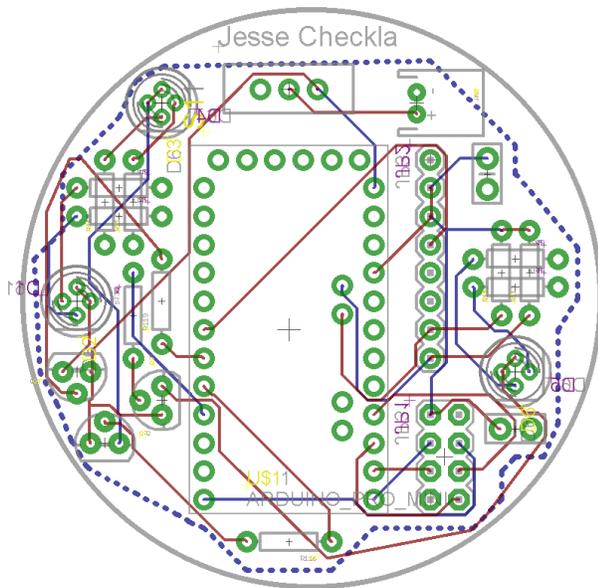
2 Layer PCB Layout (EAGLE CAD)
